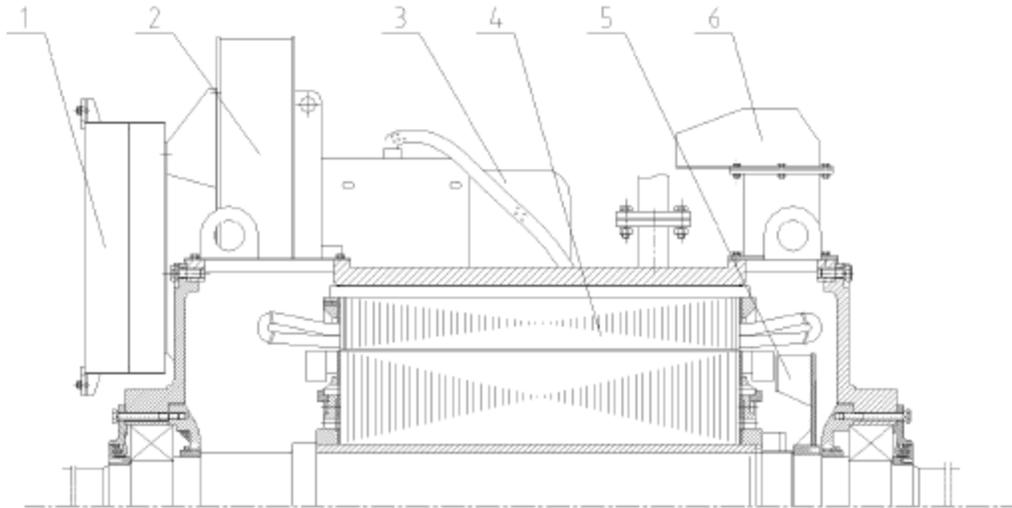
shows a fracturing pump air-cooled device. *Id.* ¶ 33. In operation, cool air enters through inlet 1 and is compressed by fan 2. *Id.* The compressed air flows into pump motor core 4 and removes heat therefrom. *Id.* Fan 5 draws the air out through outlet 6. *Id.
